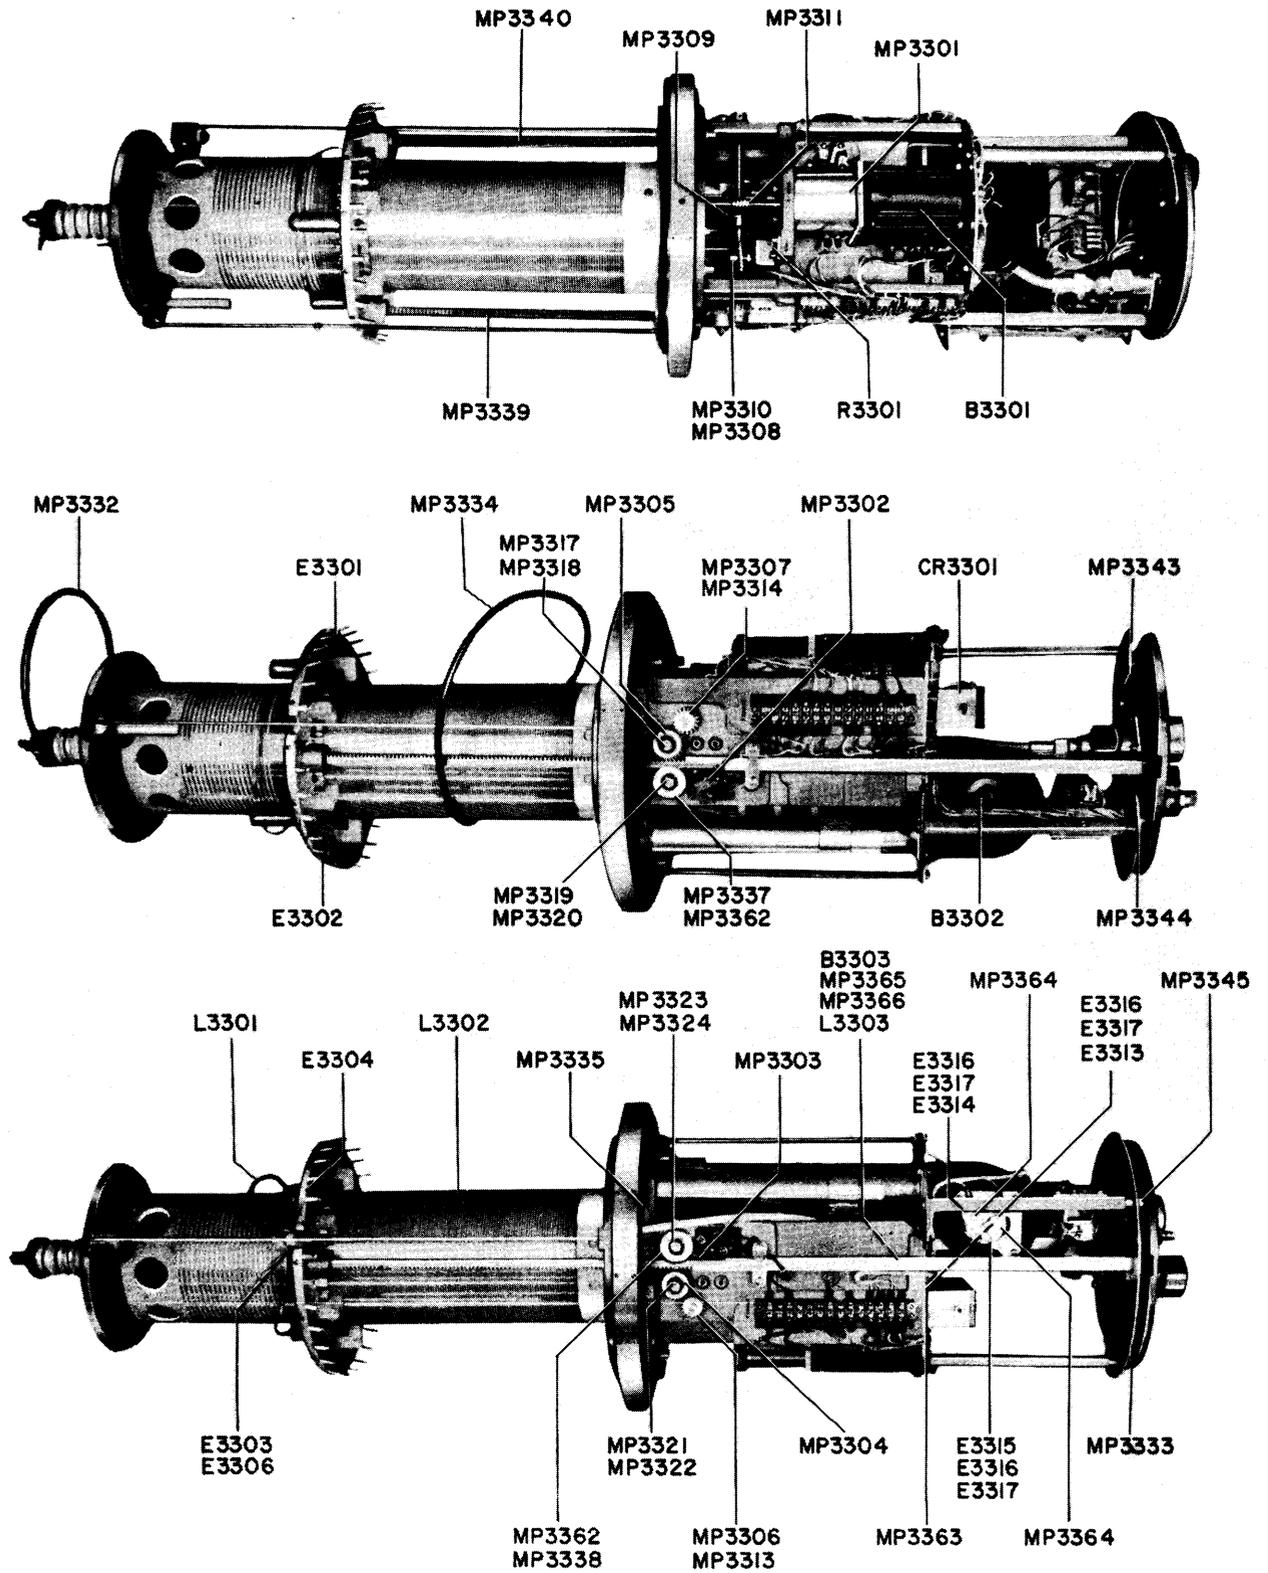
B. Mounting MT-2170A/WRT, Location of Parts
